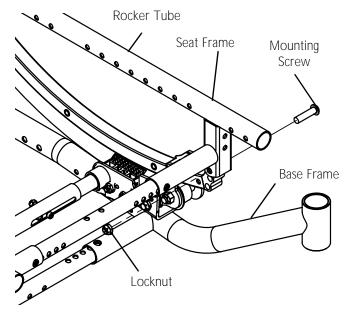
Removing/Installing Rocker Tube (Foot Tilt)
